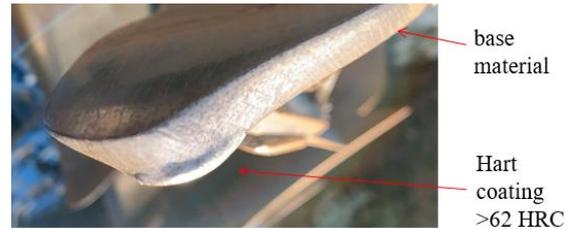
Soil working tool with hard coating on lower side. Picture shows part after testing. Shown is a typical wear/a typical equilibrium state because of combination of different materials with a hardness ratio base material : built-up welding 1 : 2.
